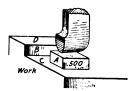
Use of size block. A, ½" size block; B, shoulder; C, finished surface; D, surface to be finished $\frac{1}{2}$ " from C. A set of gage blocks or "size blocks" is of great value to gage the setting of the tool for shoulders or similar projections. Gage blocks of any desired size, hardened, ground lapped for extreme accuracy, may be pur-chased, but for ordinary shaper work a piece of cold rolled steel of the required thickness will answer.
